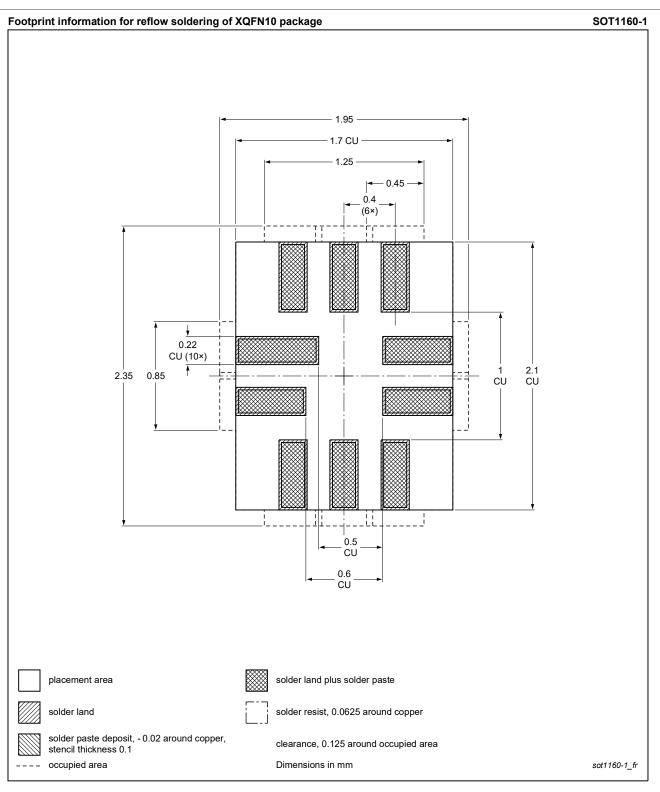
SOT1160-1 (XQFN10) footprint information for reflow soldering
